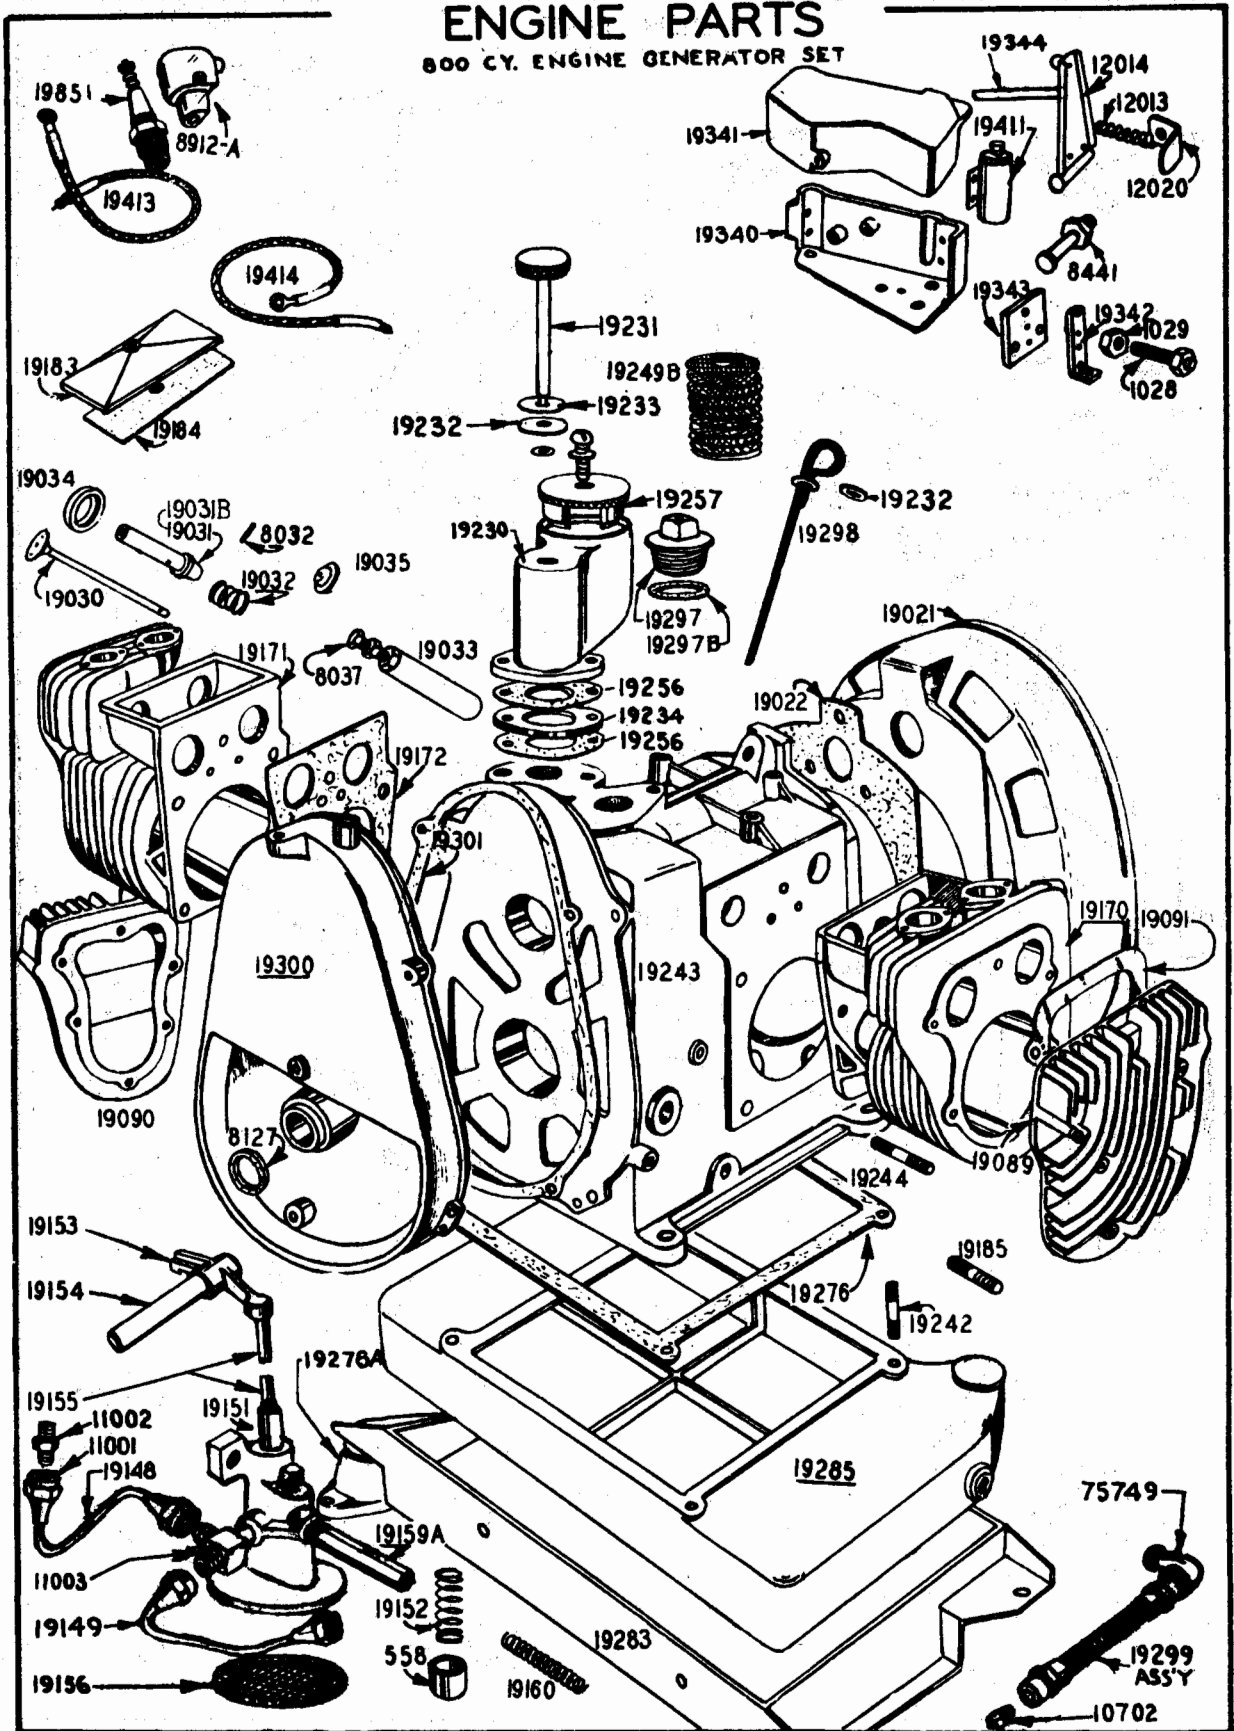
Engine Parts—Main Components for Engine Generator Set Type CDO-73004
